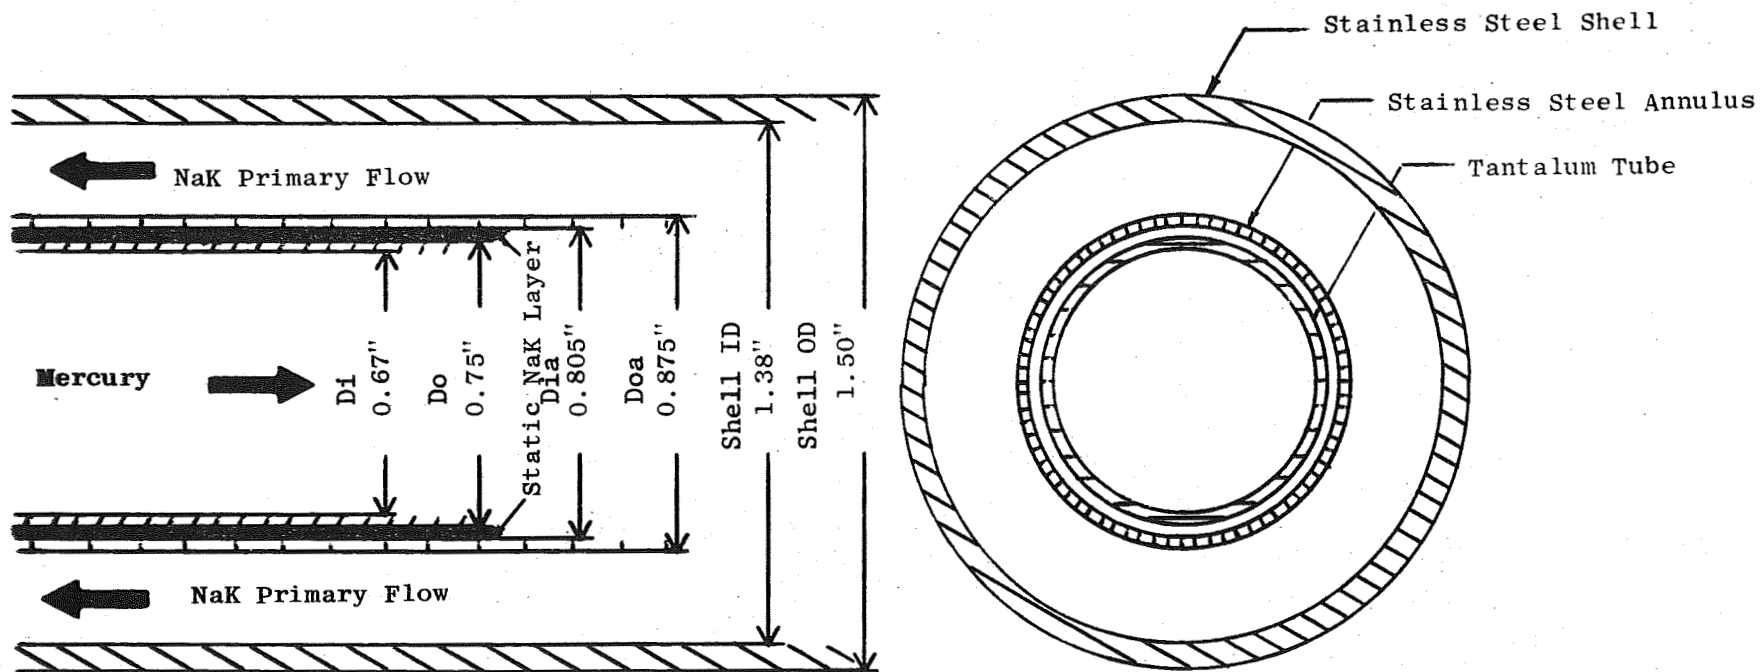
Cross Sectional View of the Single Tube Test Boiler.
